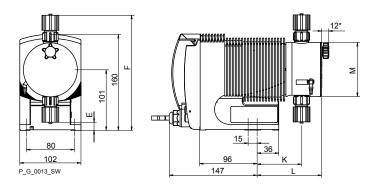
Dimensional drawing gamma/ L, material version PPE, PPB - dimensions in mm
